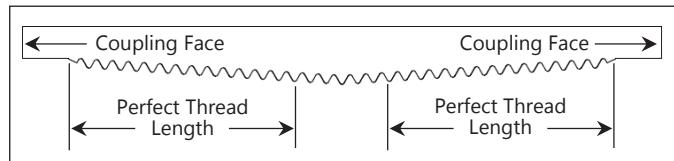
Thread dimensions of an API round thread coupling.
